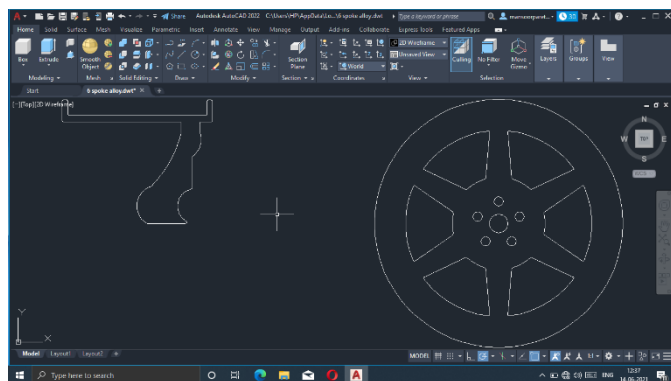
INITIAL DRAWING OF 6-SPOKE ALLOY
